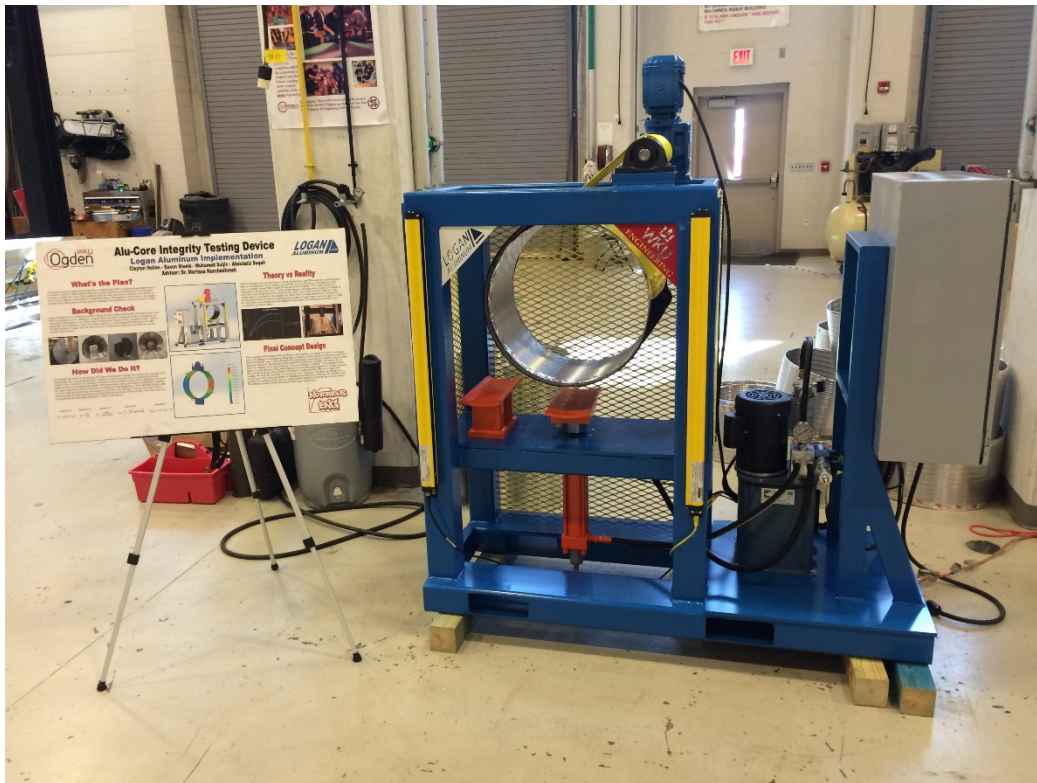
Alucore crush testing machine built by the Notorious ENG team
